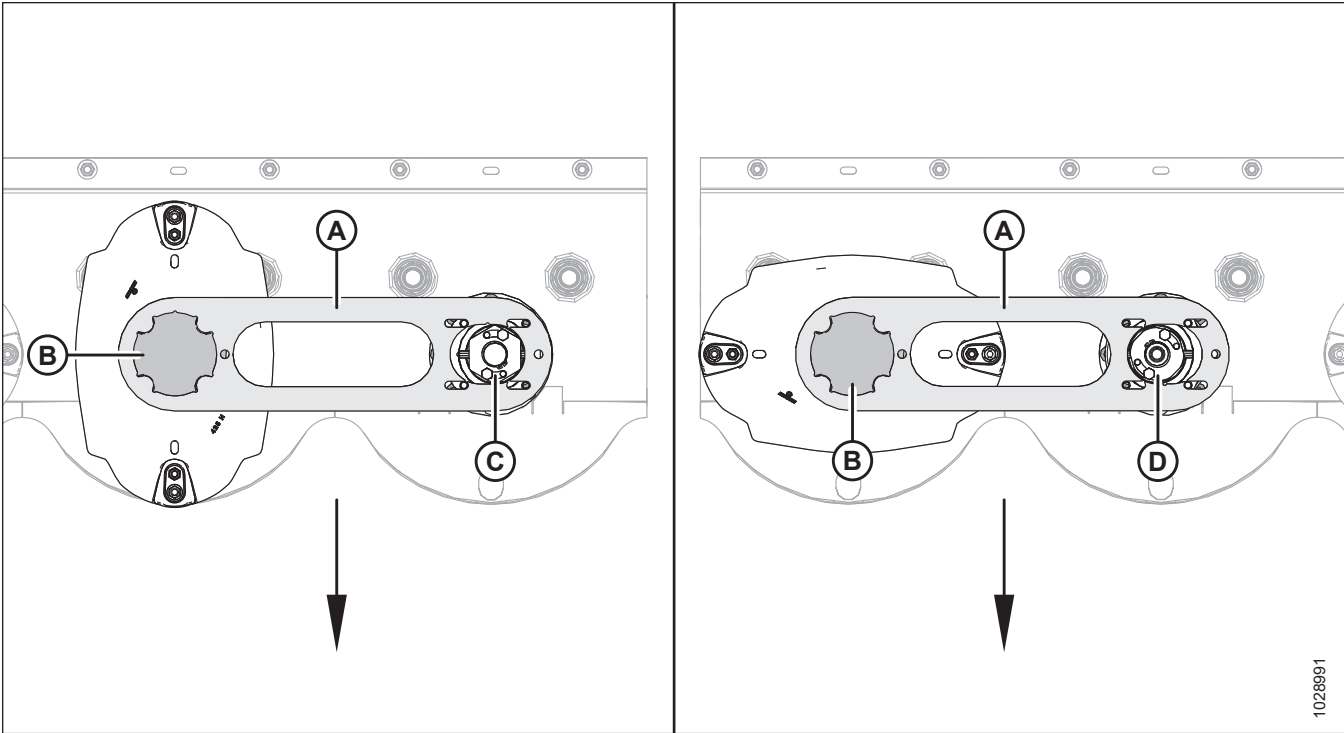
Checking Timing with Disc Timing Tool – View from Above
